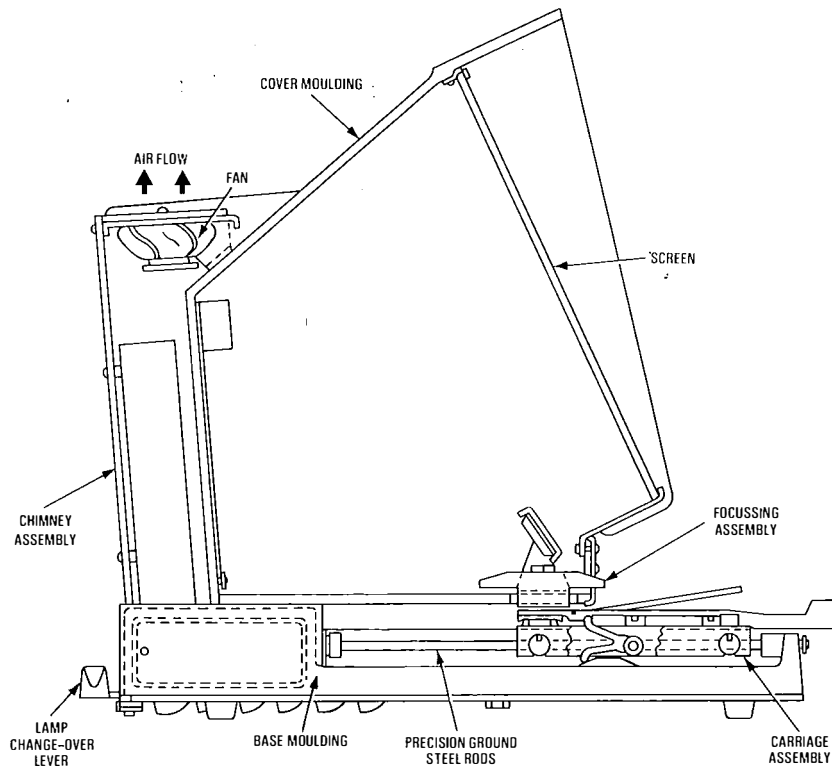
Cross-section of Reader DQ No. 1A showing carriage assembly
